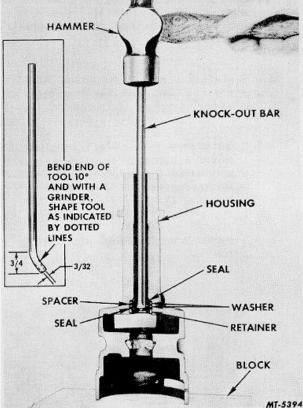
Removal of Seals, Washers, Spacer And Retainer from Distributor Housing (Housing cut away for illustrative purposes)
